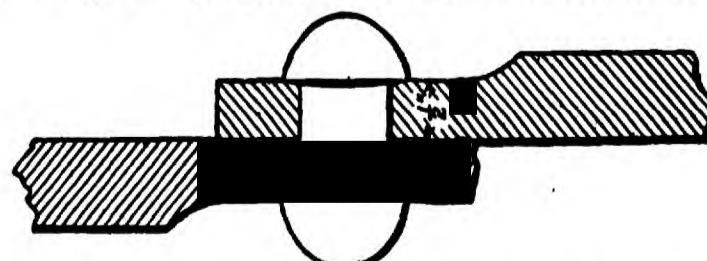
Circumferential Joint for Thick Plates of Horizontal Return Tubular Boilers.
